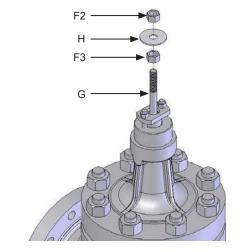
Thread Indicator Washers and Nuts onto Valve Stem
